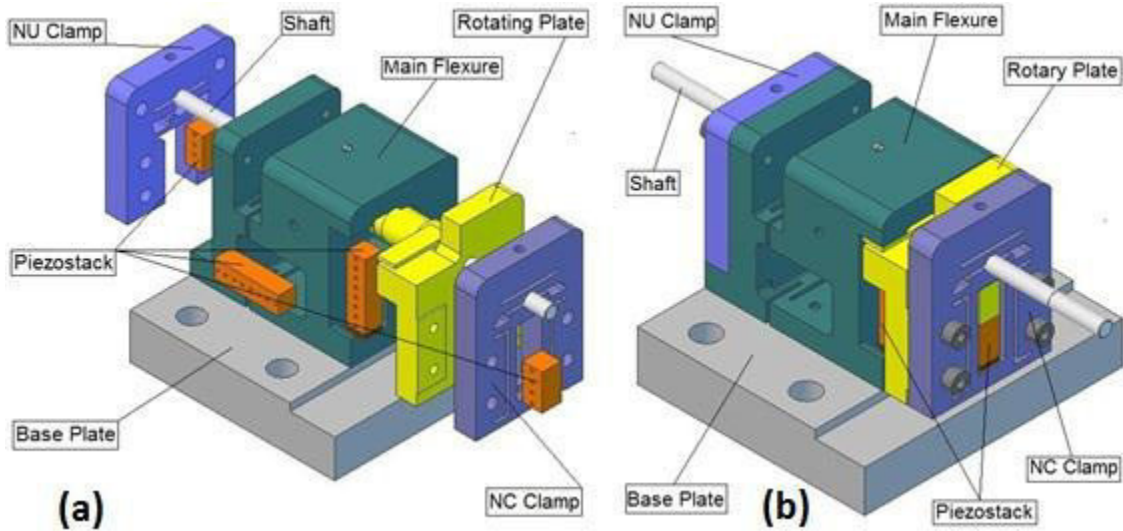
(a) Actuator model Exploded view (b) Actuator model showing different component
